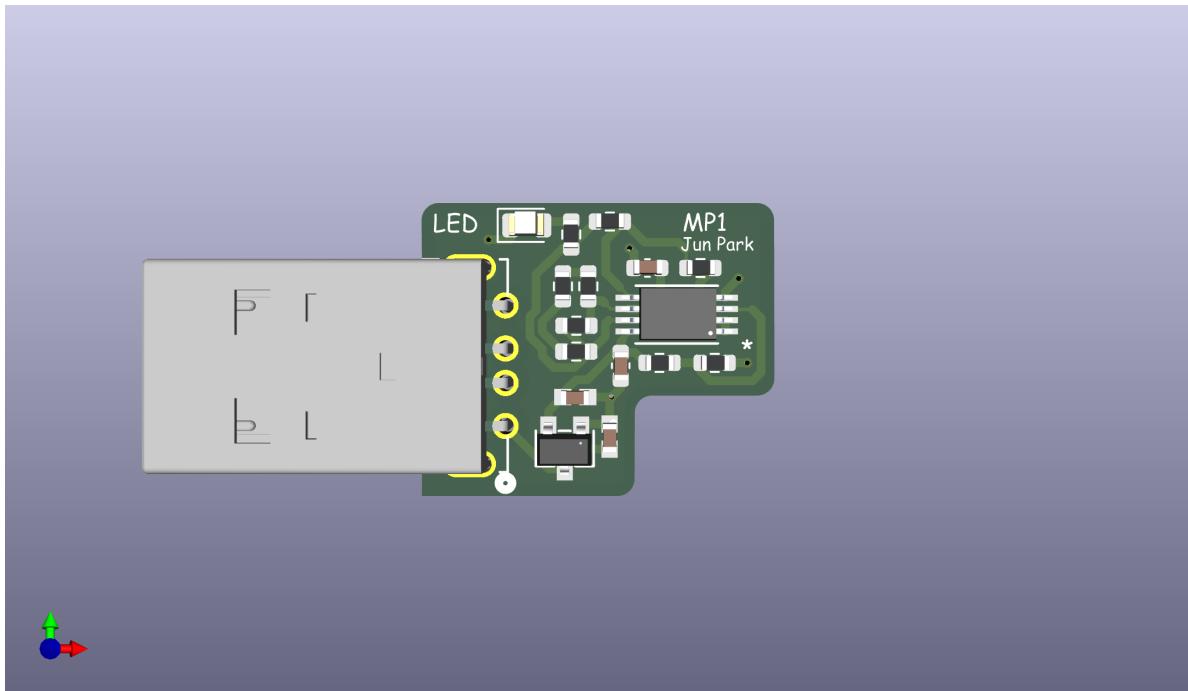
3D rendering of the final PCB layout generated in KiCad, showing overall component placement and board form factor.
